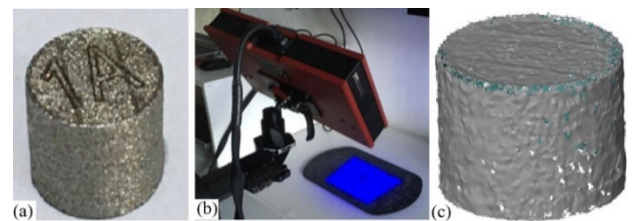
a) 1A printed sample, b) optical measurement process, c) scanned geometry of the sample
